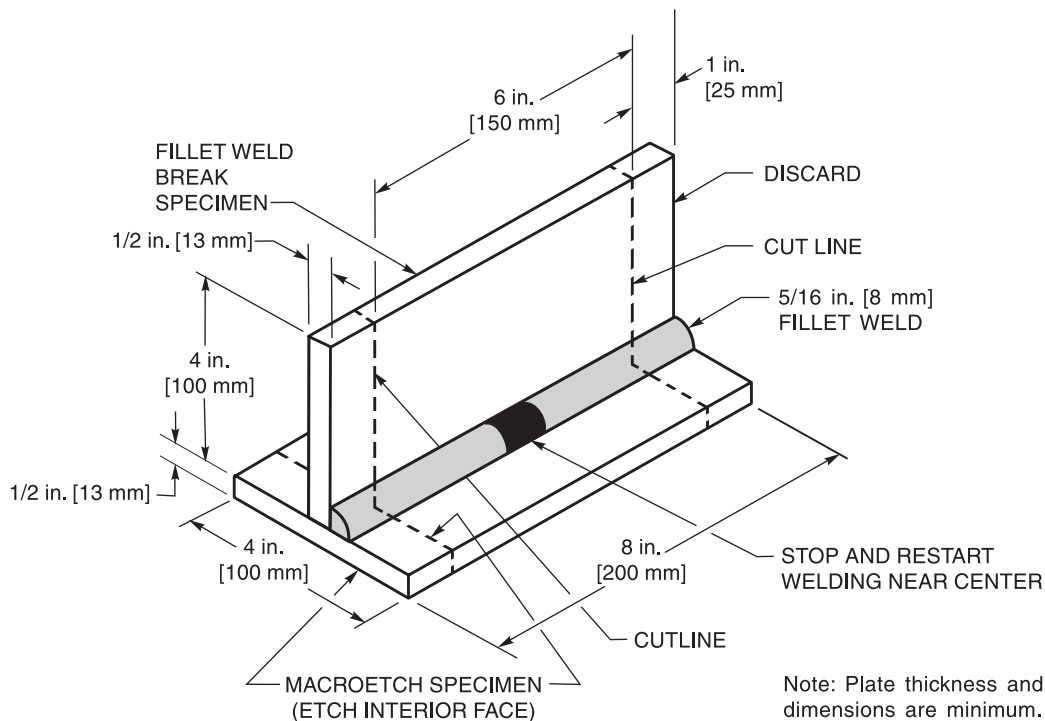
Fillet Weld Break and Macroetch Test Plate—Welder Qualification, Option 1
